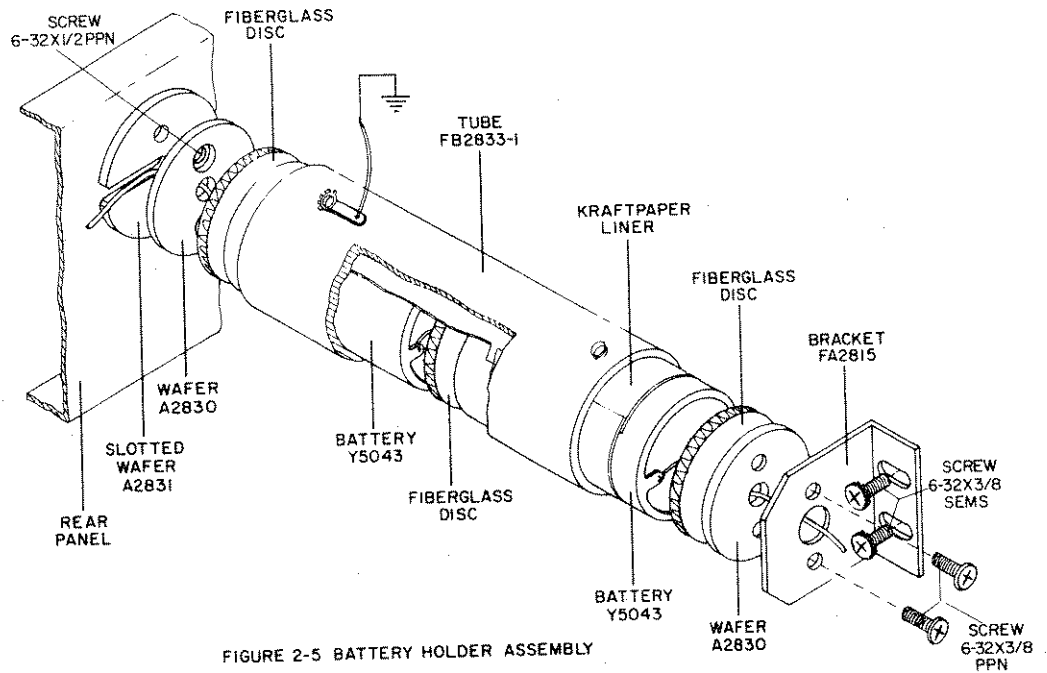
BATTERY HOLDER ASSEMBLY
